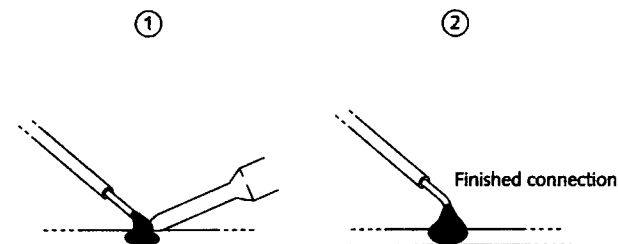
Solder your wire to solder bump on printed circuit trace.
